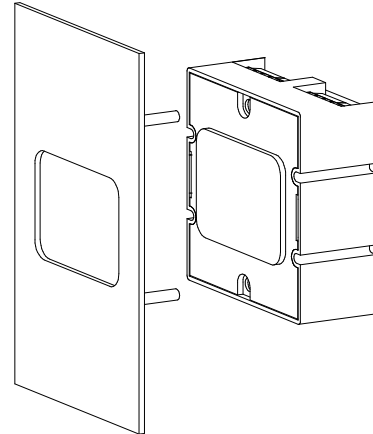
Display to be fixed on car and landing control station by means of welded bolts
